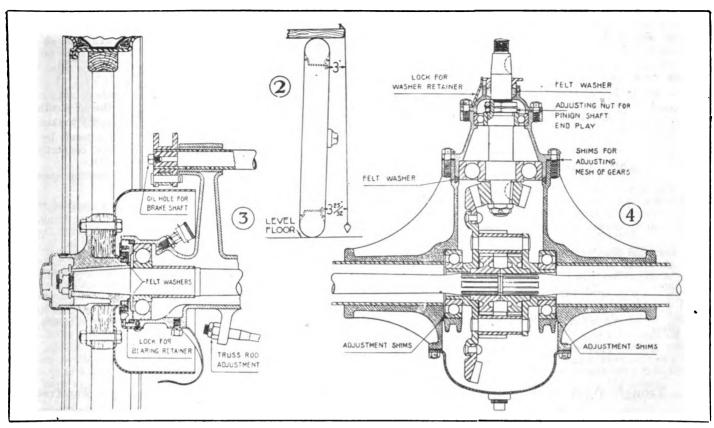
Measuring the camber of the front wheels. Fig. 3—Section through the wheel to show the felt washers. Fig. 4—Adjustment of the gear mesh is by means of shims which hold the gear in correct position
